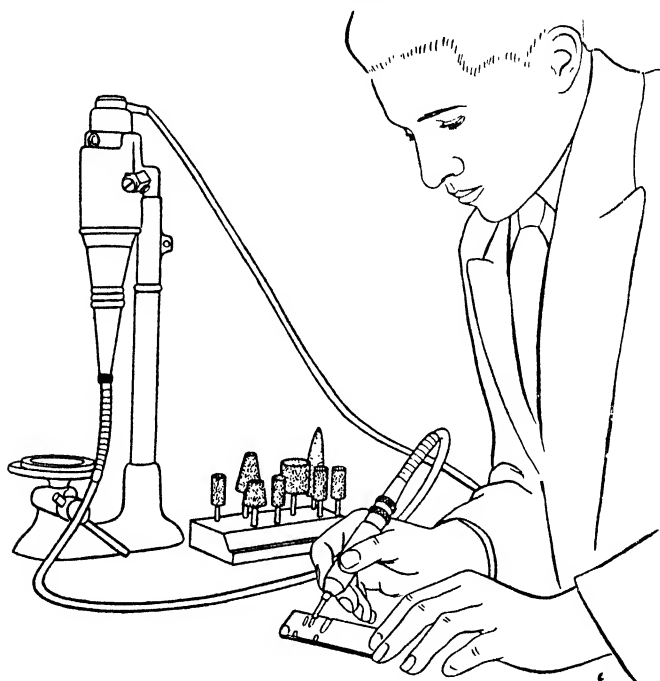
Engraving by using the hand-piece of a flexible shaft driven by a small hand motor, made stationary by a special stand
